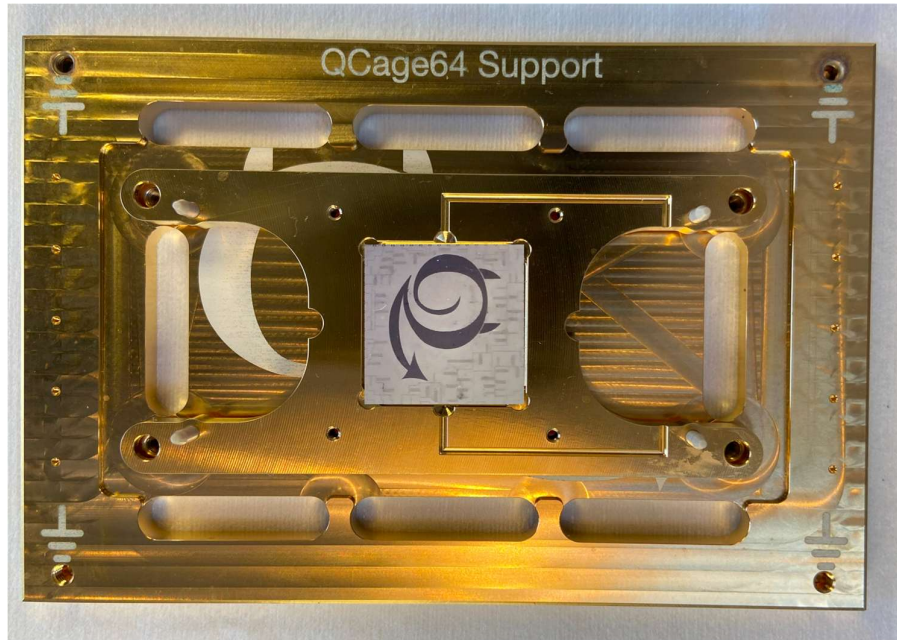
Chip holding frame (QCAGE-64-FRM) placed onto support fixture (QCAGE-64-WBF) with chip placed in cavity.
